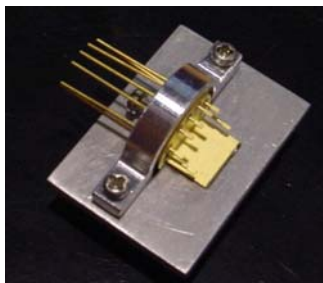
Holding jig for integration of CoS-TEC to heatsink on header
